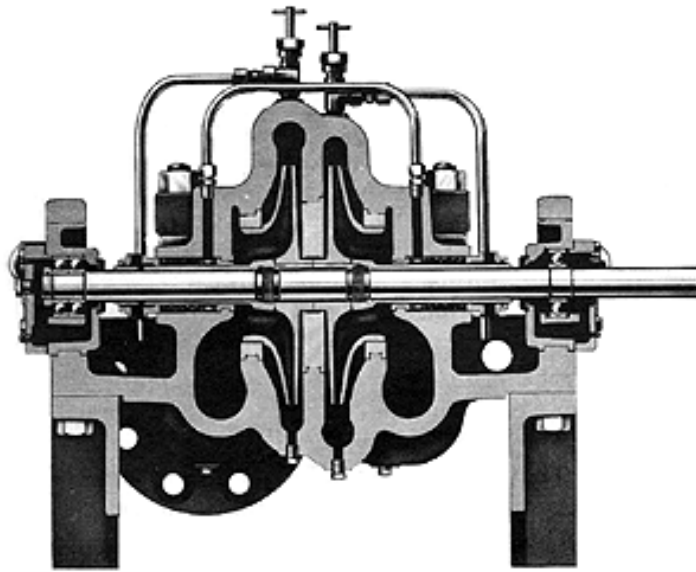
Two-Stage Volute Pump with Opposed Impellers
